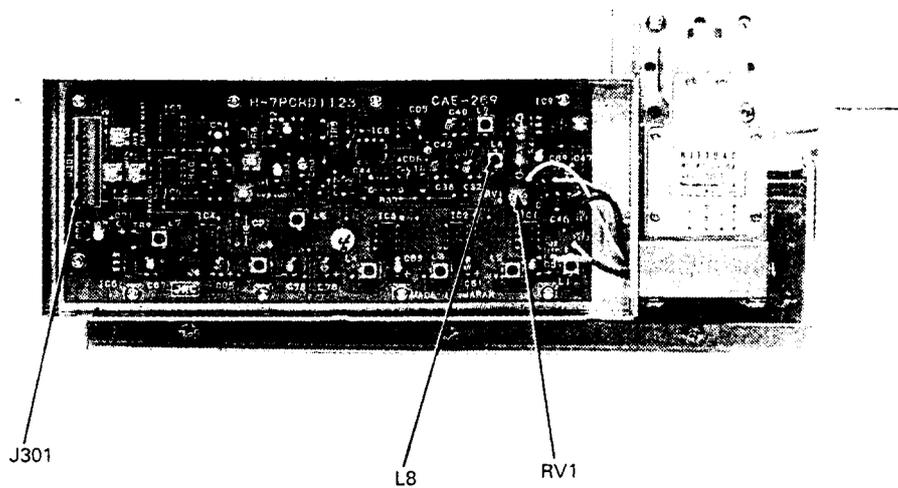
RECEIVER ADJUSTMENT OPEN ARRAY SCANNER
